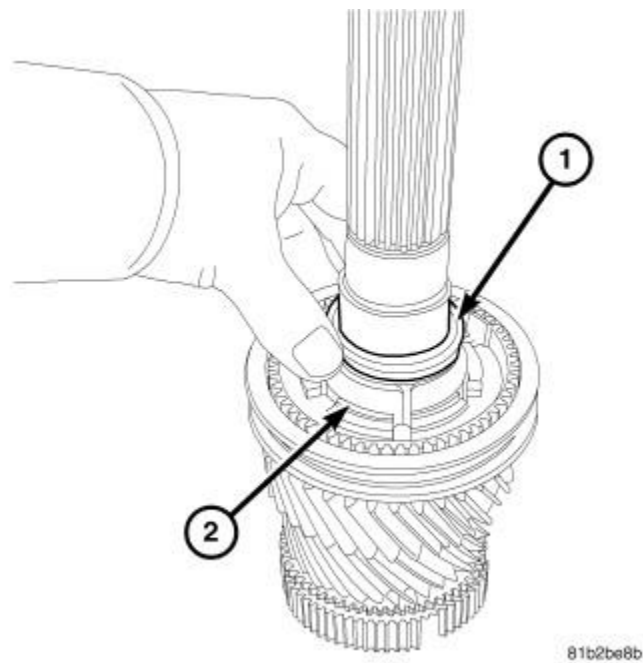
1-2 Synchronizer Hub Split Ring Retainer & Split Rings
